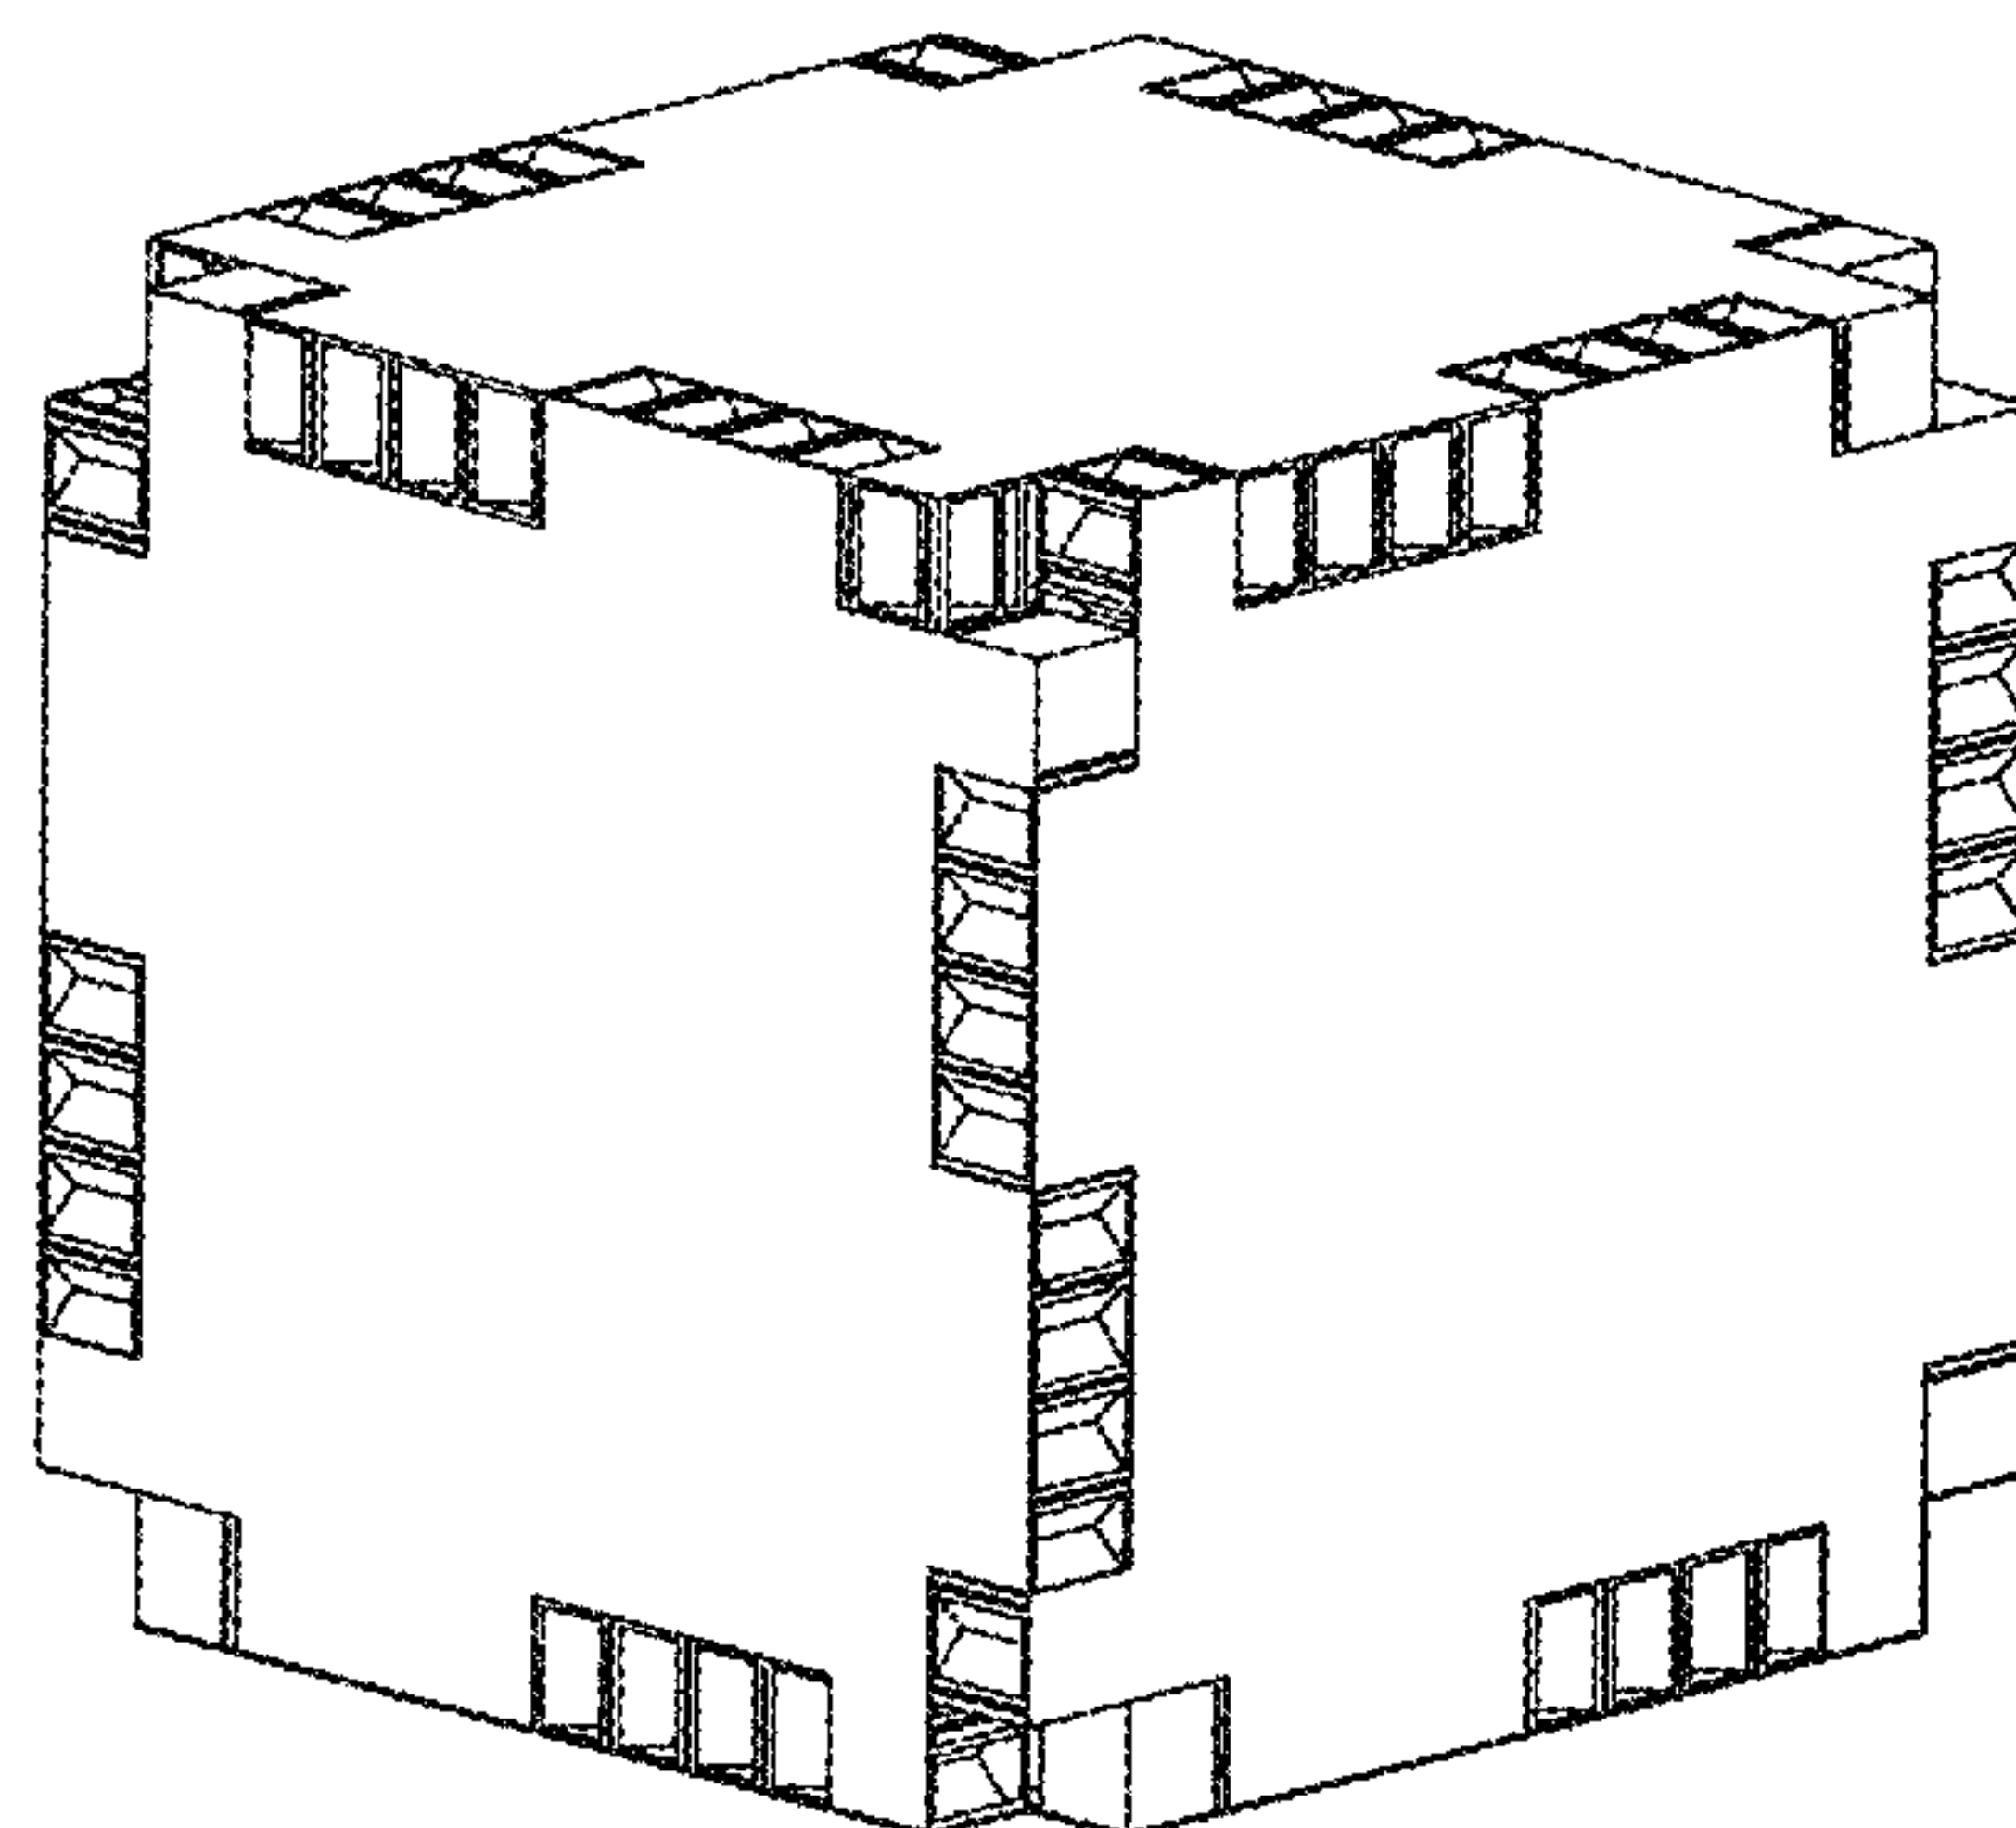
is a front top perspective view of container, showing all 6 panels in an assembled configuration;
